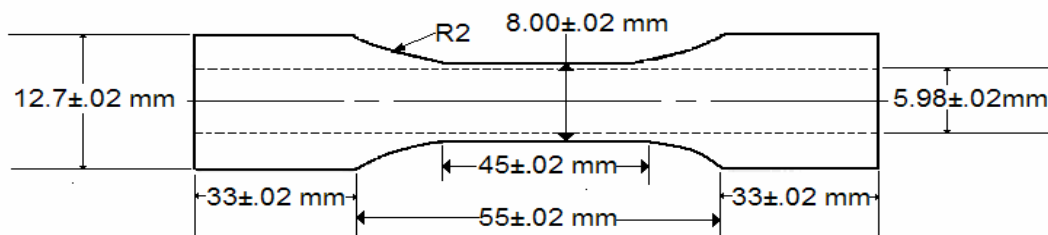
Thin-Walled Tubular Test Specimen. Drawing not to scale.
